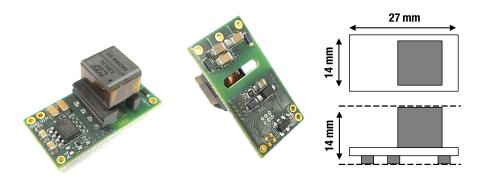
Board variant-A (a) top view (b) bottom view (c) dimensions
